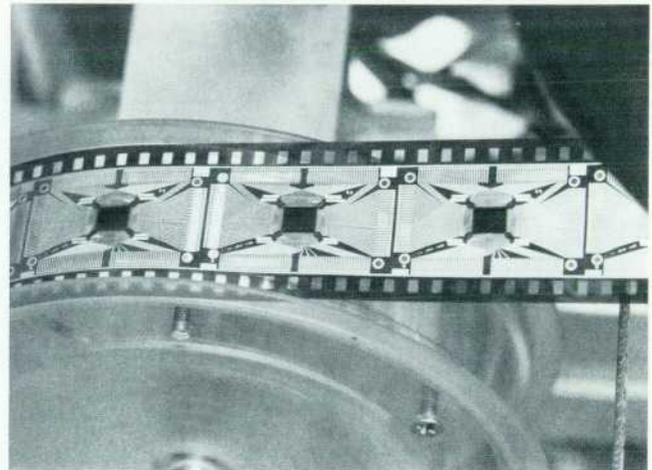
1LT8 ICs are packaged for tape automated bonding (TAB) and can be handled like movie film.
